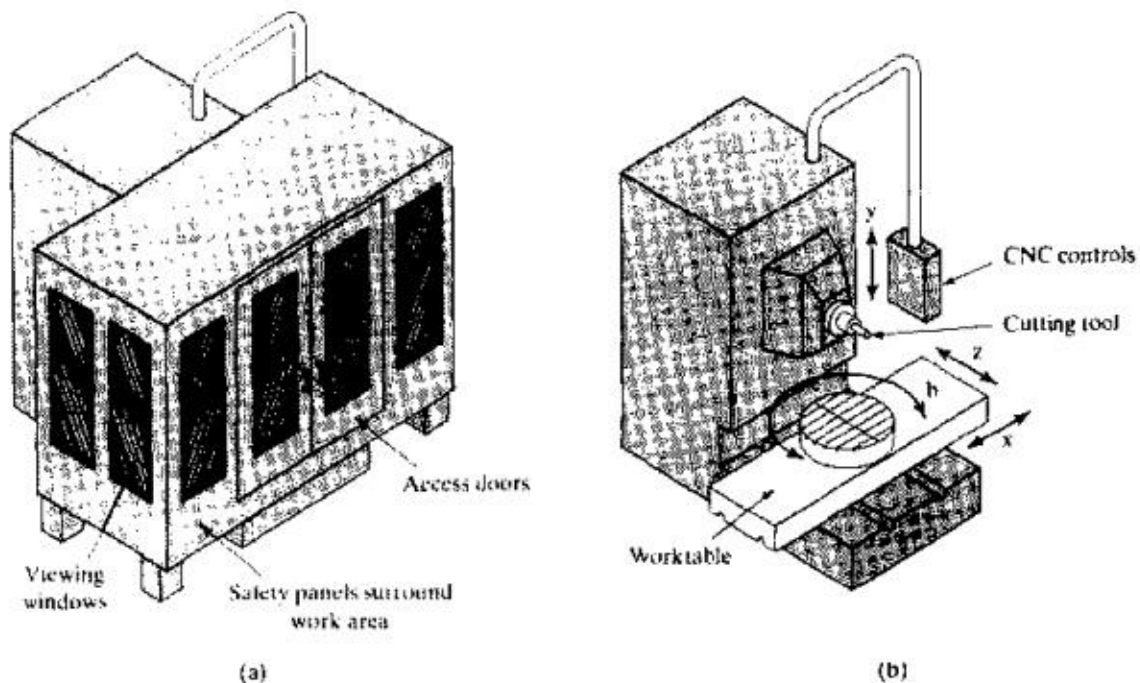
(a) Four-axis CNC horizontal milling machine with safety panels installed and (b) with safety panels removed to show typical axis configuration for the horizontal spindle.
